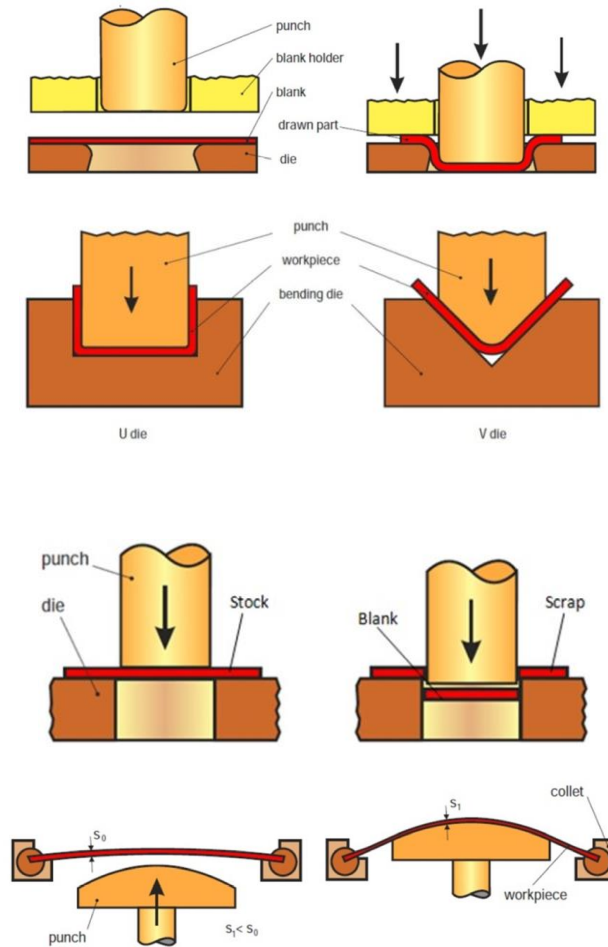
Drawing, Bending, Blanking, Stretch Forming²²
